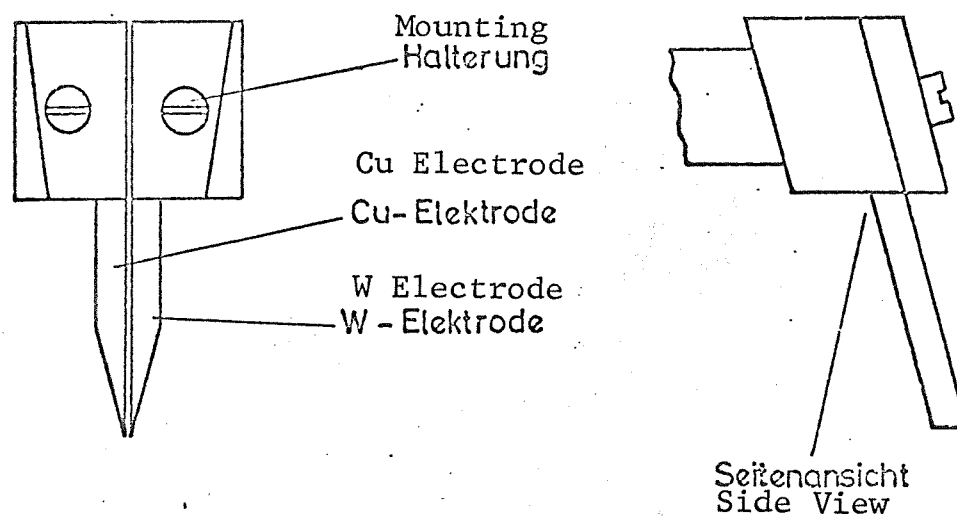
Schematic of the Cu/W welding electrode
